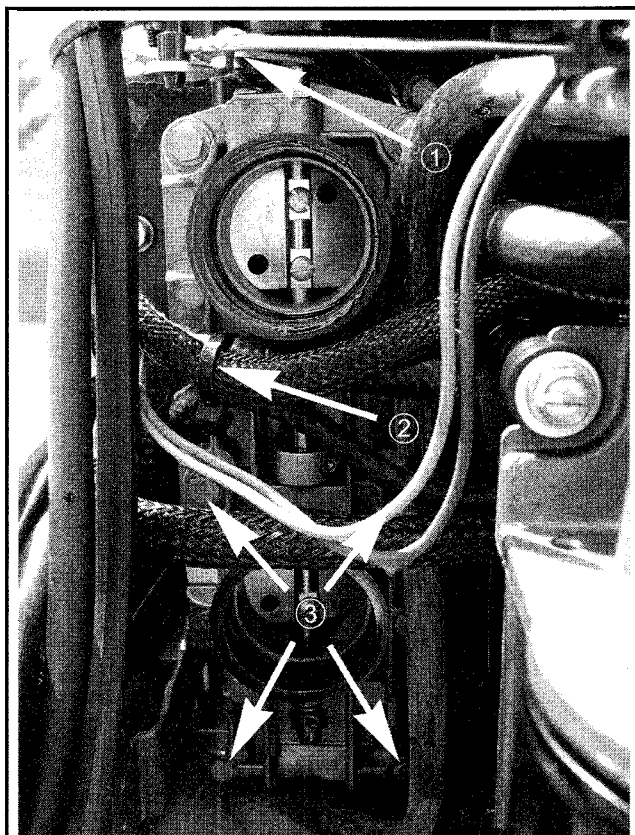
Throttle body removal is a basic matter of (1) disconnecting the linkage, (2) cutting any tie straps and relocating interfering hoses/wires and (3) the bolts around the perimeter of the assembly (number of bolts varies with model)
